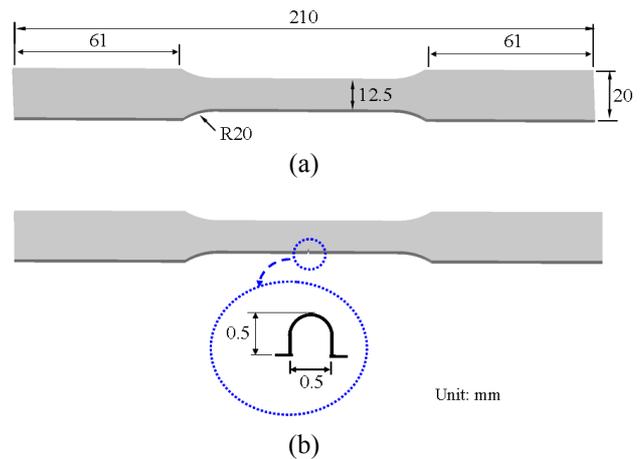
Two types of tensile specimens (a) standard sheet-type specimen (b) notched sheet-type specimen
